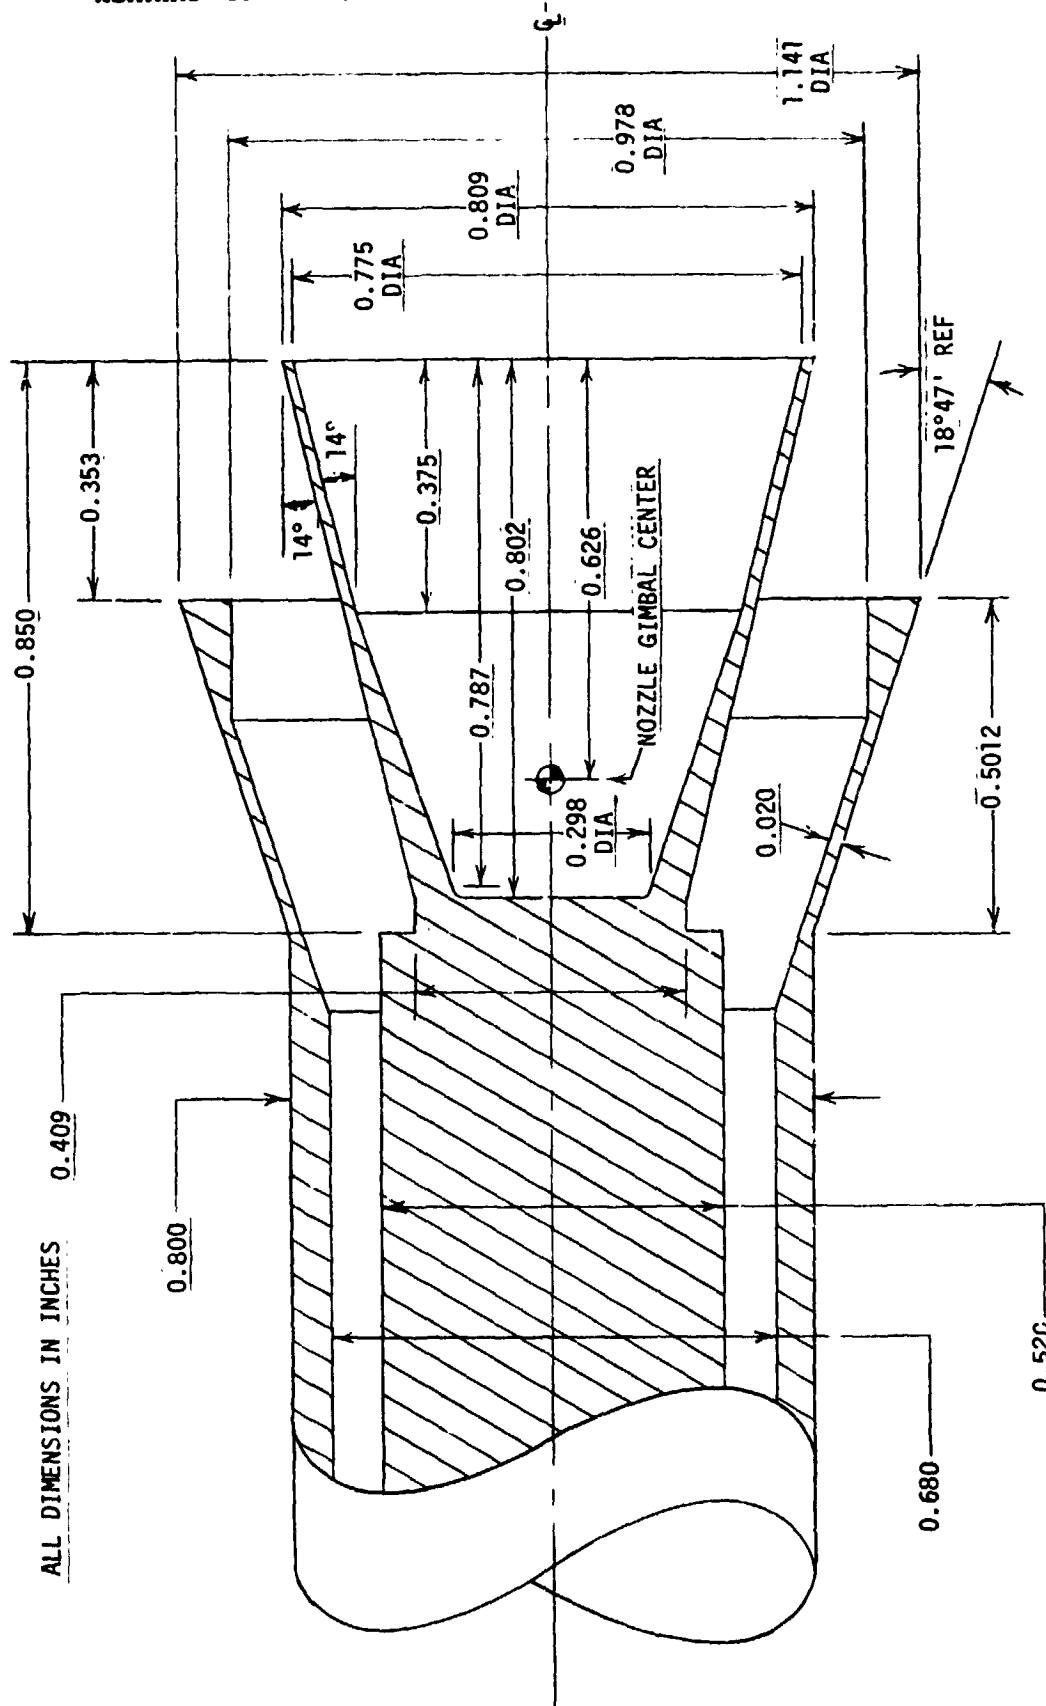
CROSS SECTION OF ENGINE SKIRT/NOZZLE (NO HEAT SHIELD)
